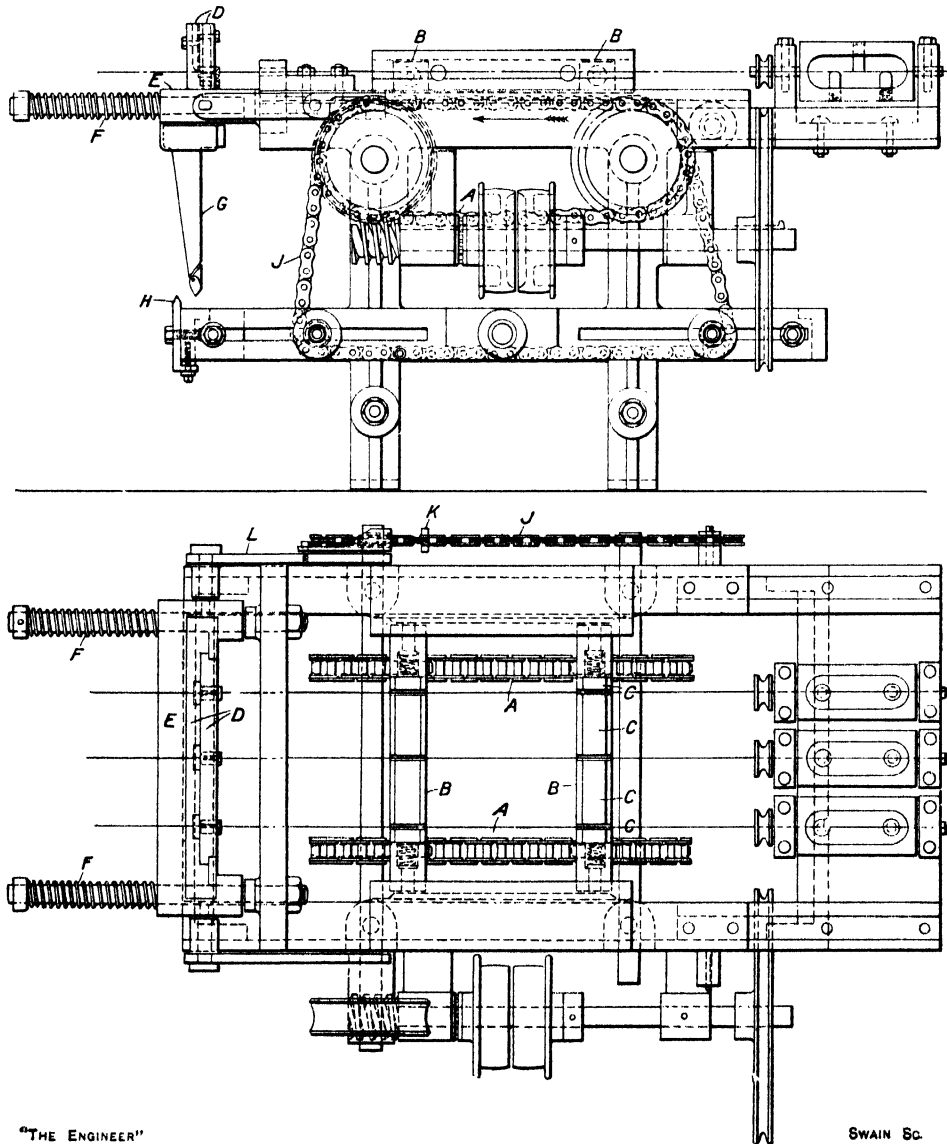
CONTINUOUS-FEED CUTTING-OFF MACHINE—J. THOMPSON.
